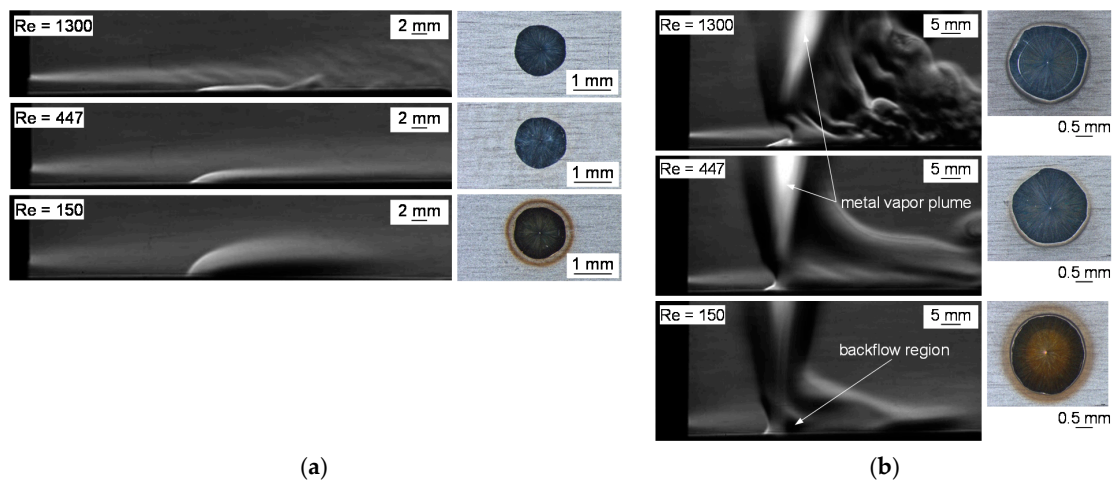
Occurrence of annealing colors depending on distance to orifice for deep penetration welding and heat conduction welding.
